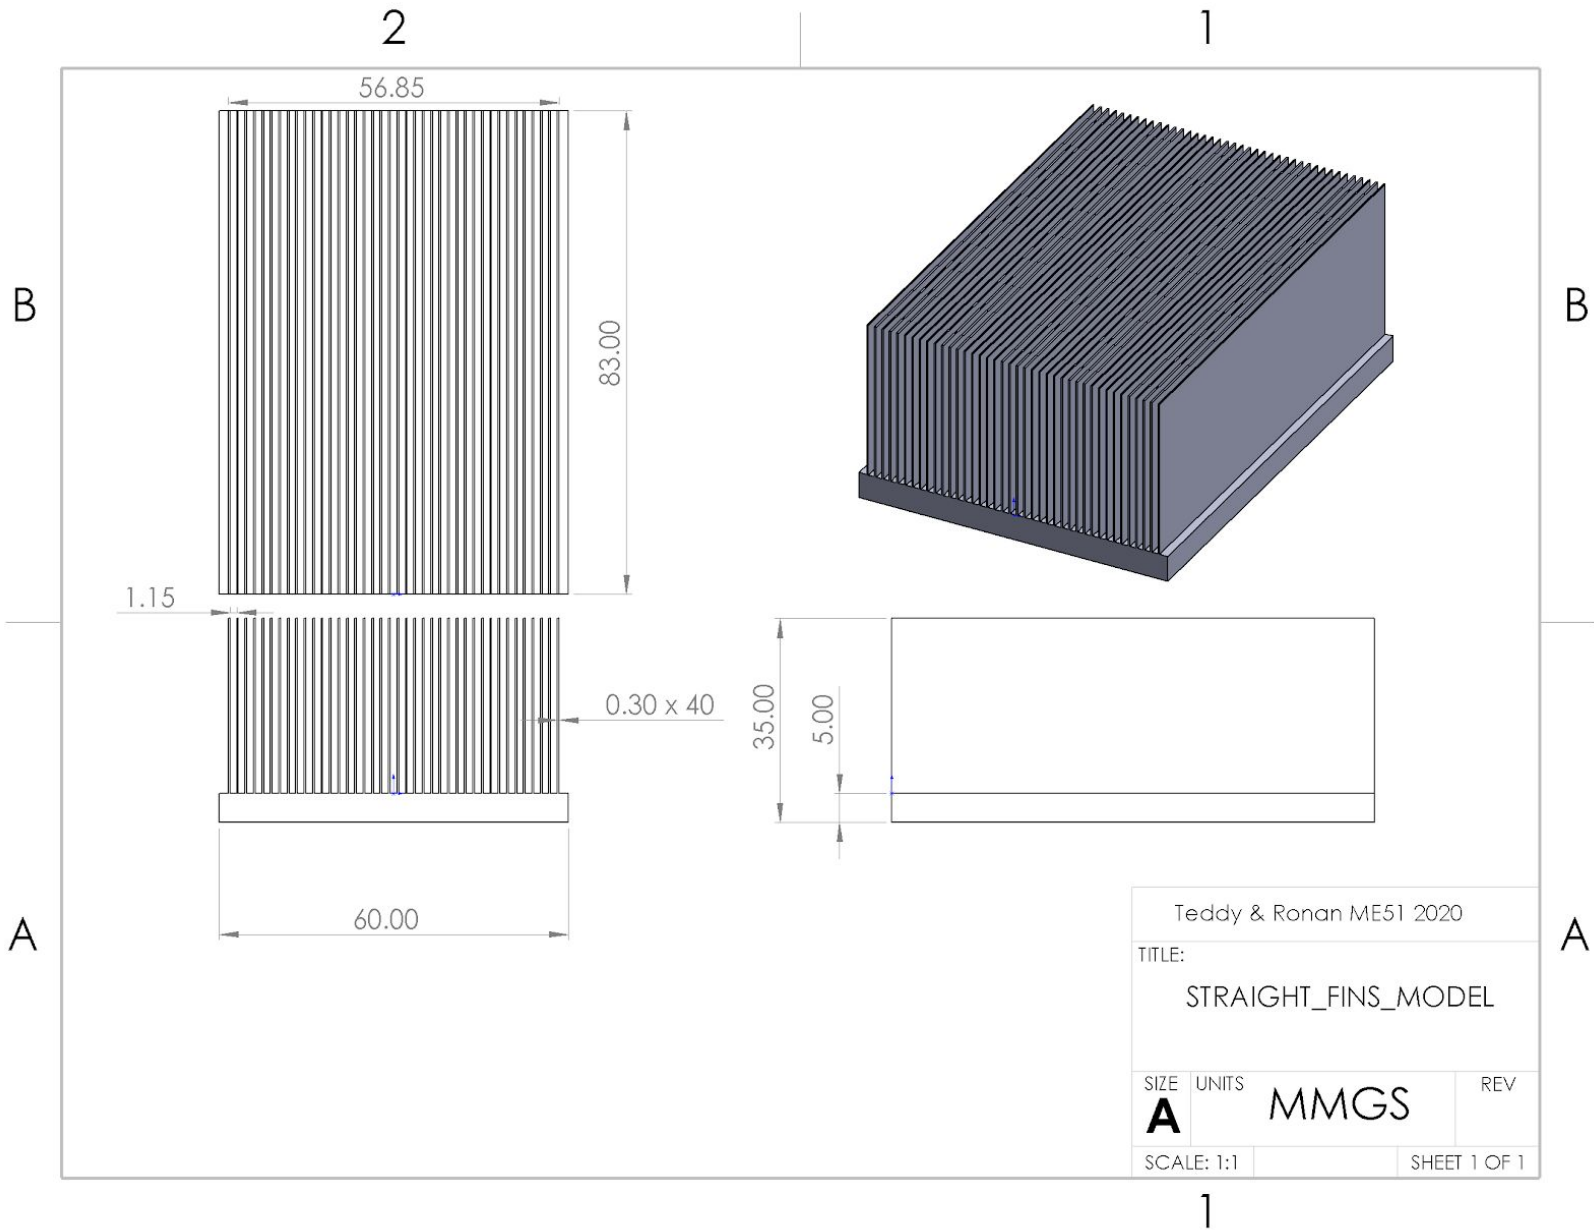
Solidworks Drawing of Straight Fins Heat Sink.
